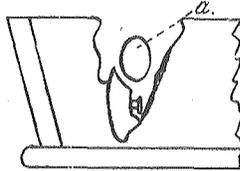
Sectional View of Lower Case, Flashed with Metal Core in Position
